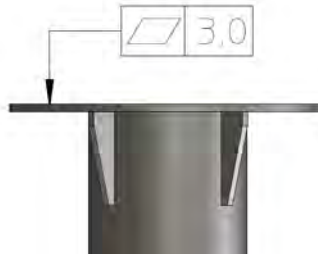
ADU mast flange, recommended flatness on the mast mount plateau
